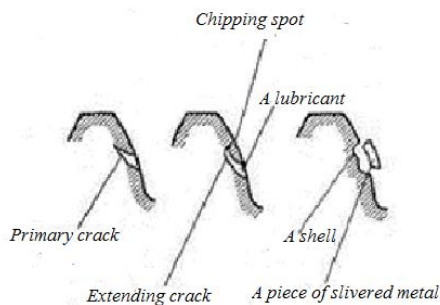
Fracturing on the involute flank of the teeth of large gear rims
